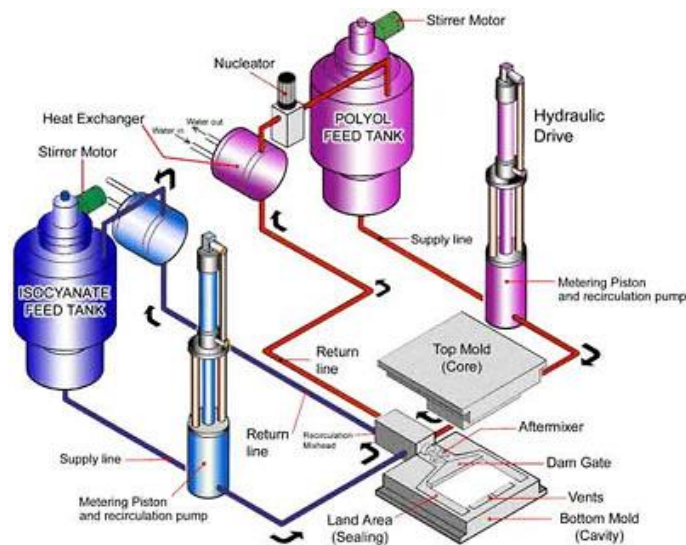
Structural Reaction injection moulding (S-RIM) ("PURMOLD - RIM Polyurethanes") [53].
